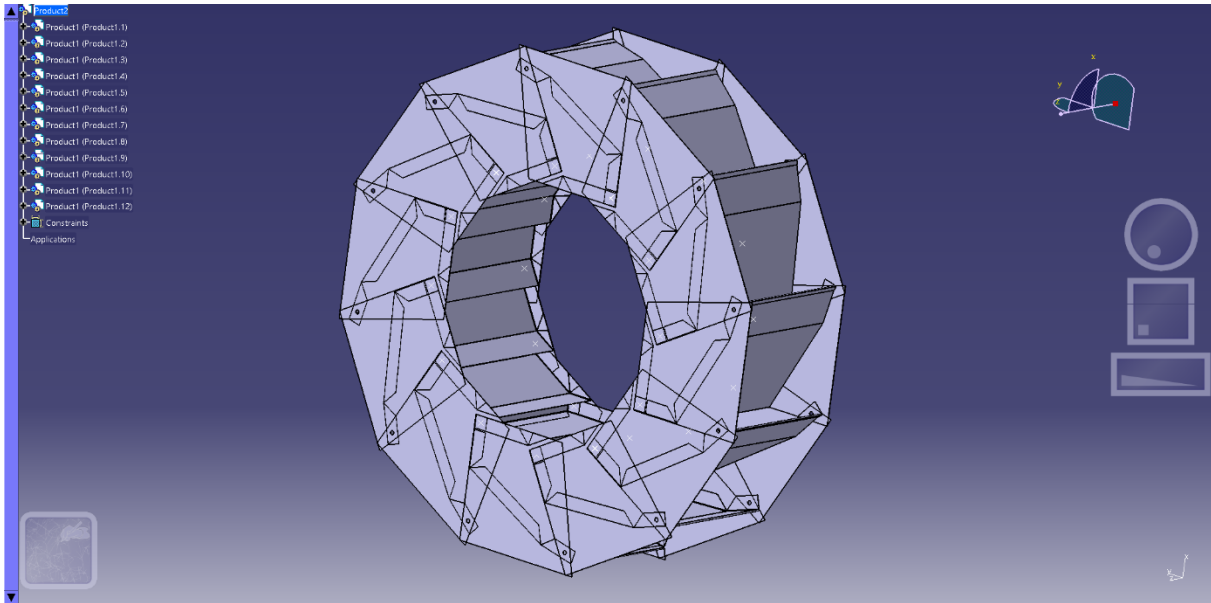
CAD-model - water wheel assembly with 12 modules
